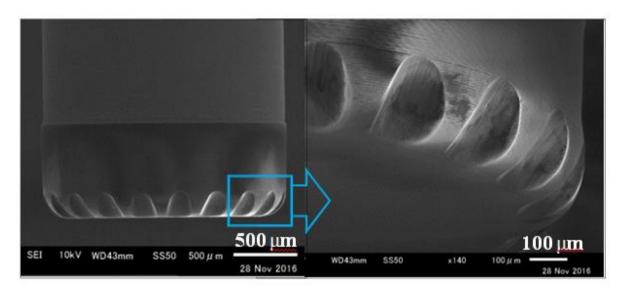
SEM images of laser fabricated micro NPD milling tools (Edges radius: 0.2 mm)
